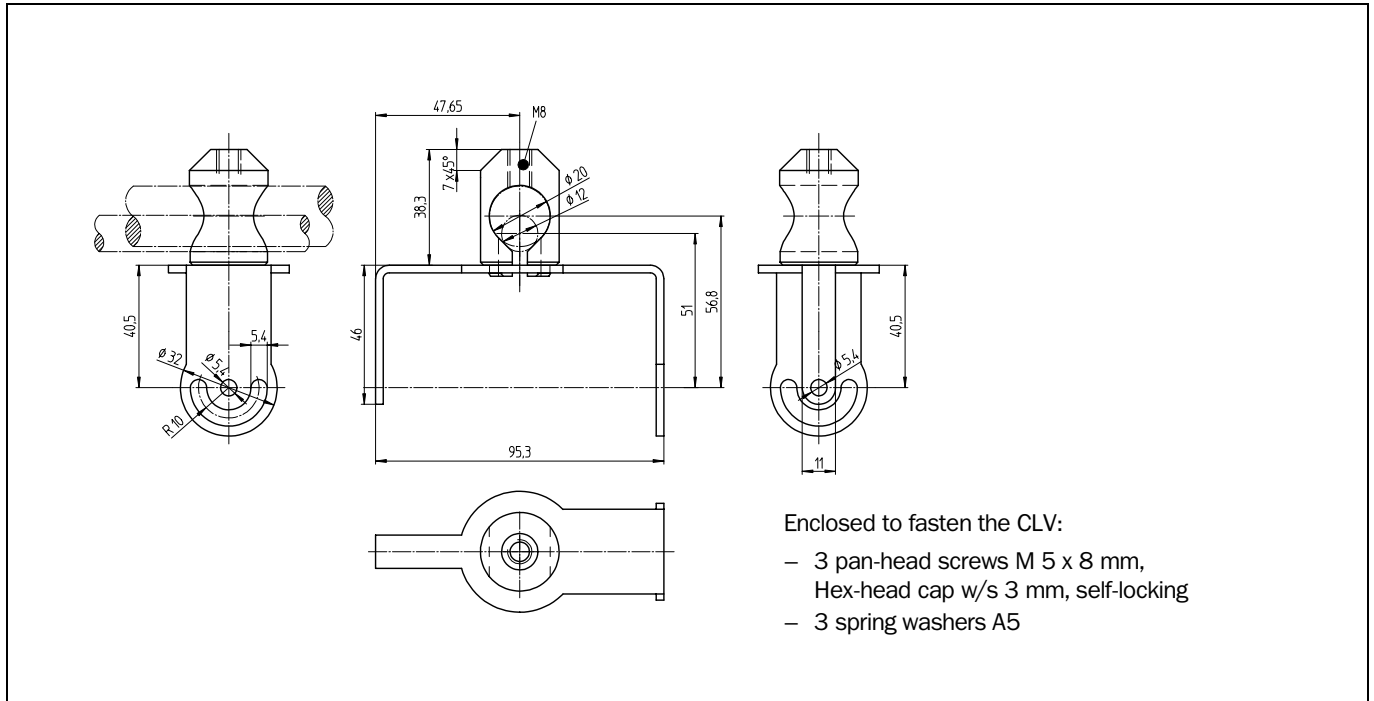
Dimensions of the rod clamp No. 2 023 691
